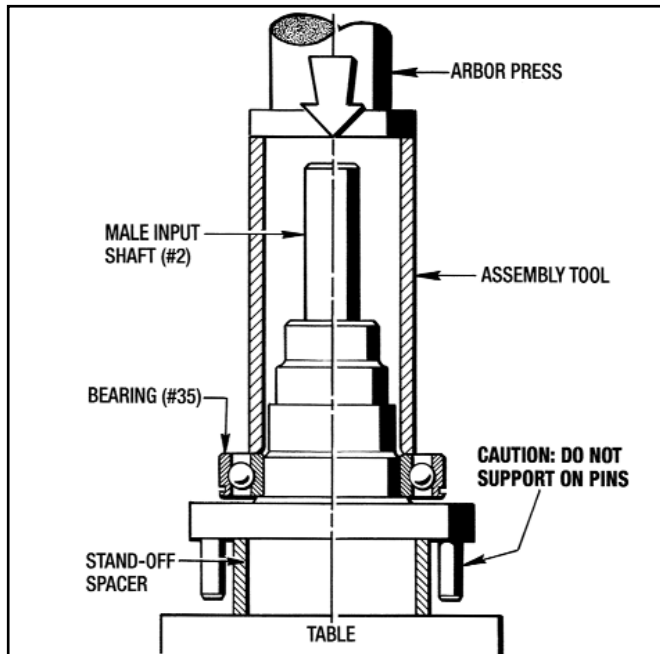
Installing Inboard Bearing (#35) on Male Shaft
